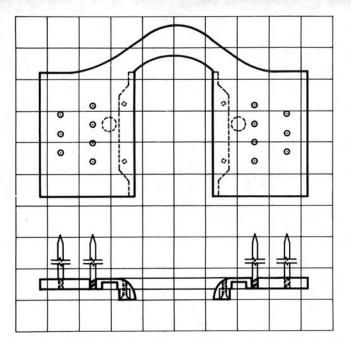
Dough holder placed on a 20-mm grid. Front edge view (below), pin length = 55 mm. Top view shown above.
